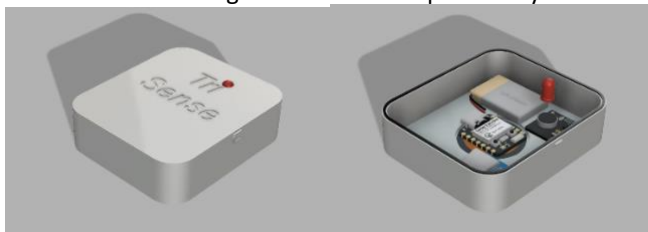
Casing with a closing clip mechanism and electronic Components stored inside TriSense
